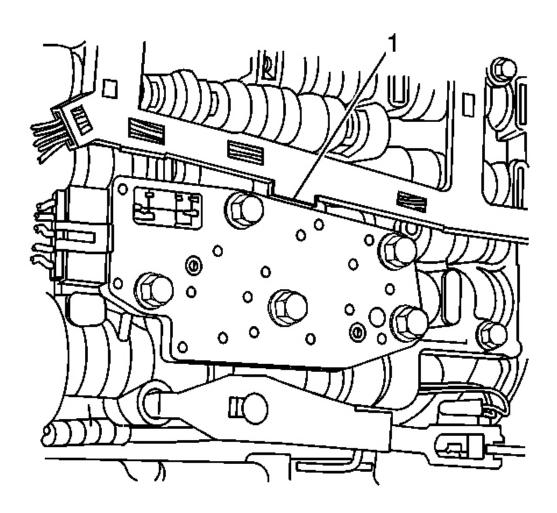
View Of TCC Solenoid Retaining Bolts Courtesy of GENERAL MOTORS CORP.
